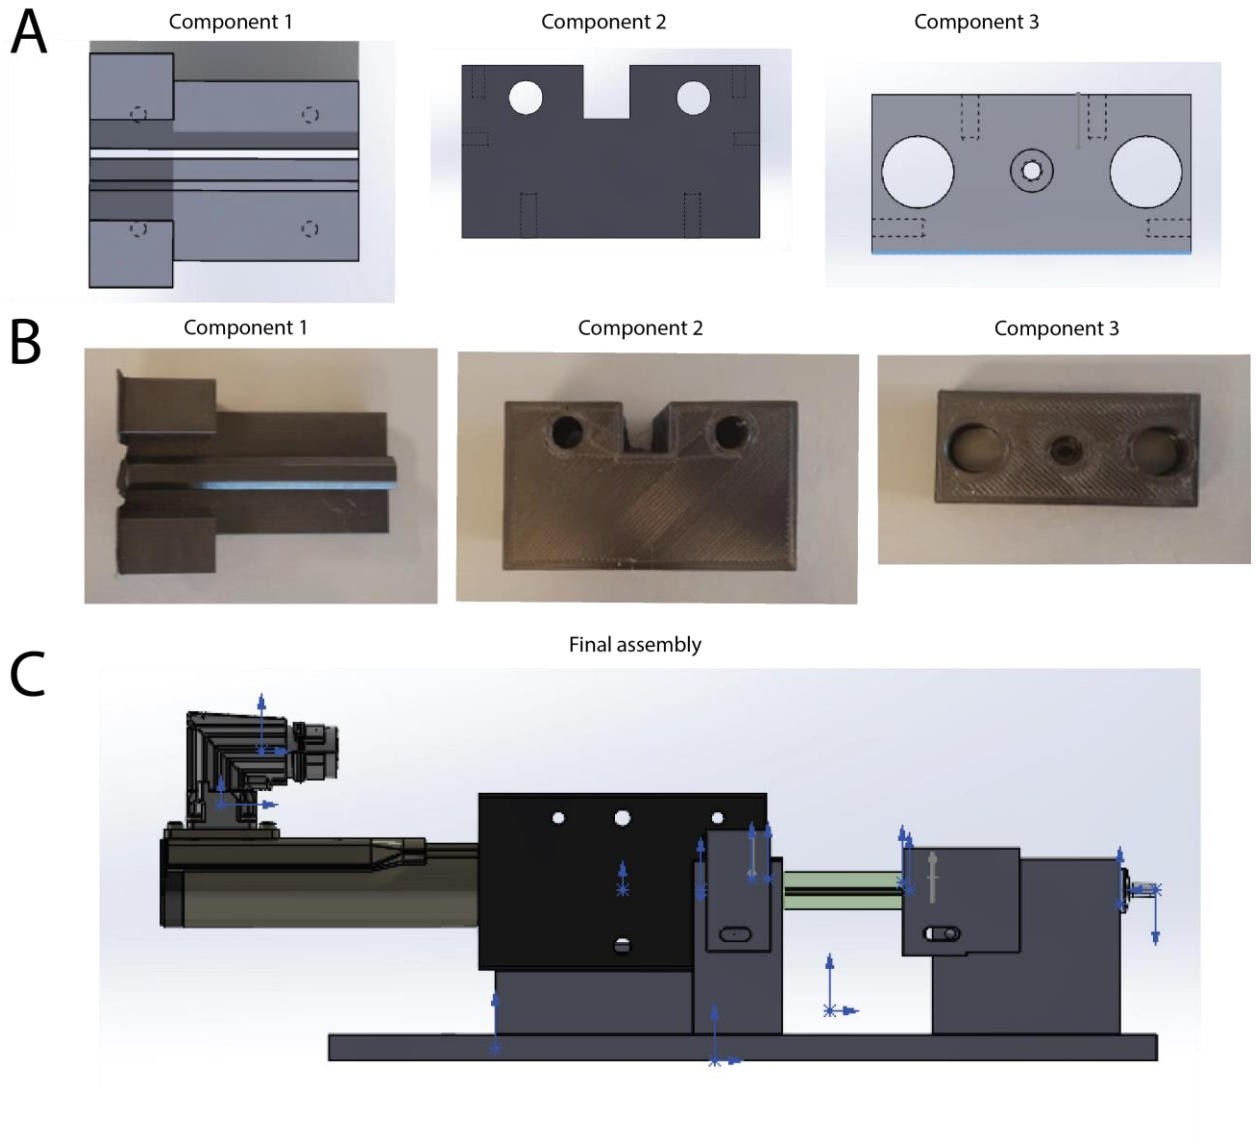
Device construction and assembly. A) CAD renderings (Solidworks) of the syringe components. B) Photographs of the printed components. C) CAD rendering of the linear actuator-syringe assembly.
